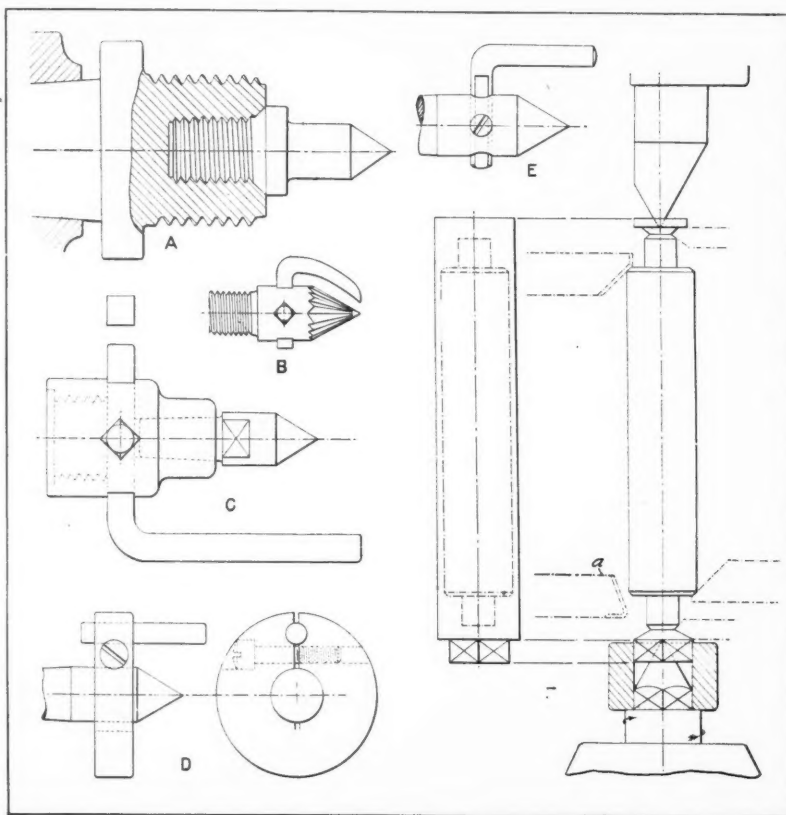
(A) Threaded Shank Center used on Lathe of Early Design; (B) Fluted Center for Driving; (C) Driving Chuck with Center; (D) Disk and Pin Drive for Small Work; (E) Pin Drive for Small Work; (F) Driving Center used on Automatic Machine
